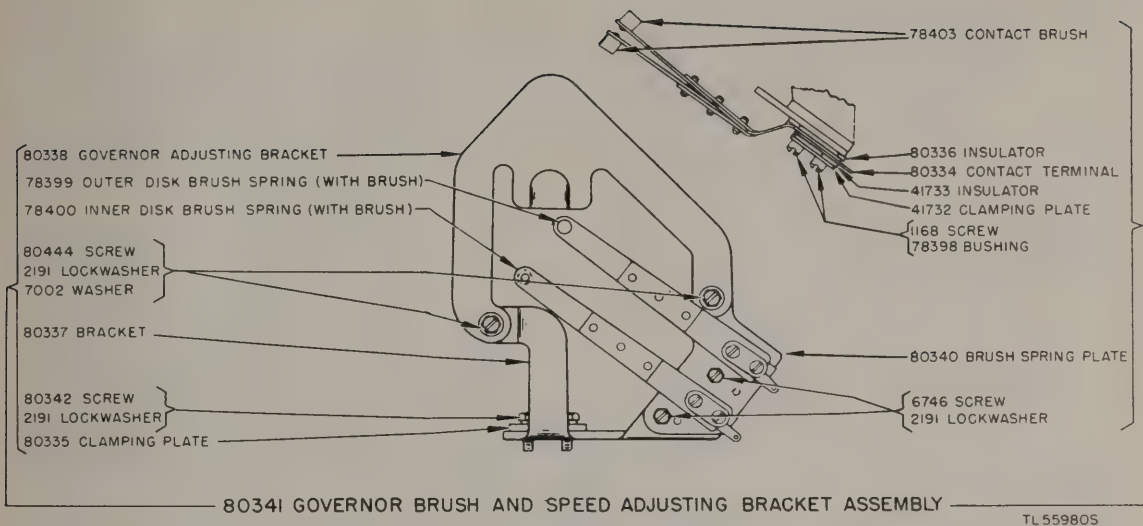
Governor brush and speed adjusting bracket assembly, location of parts.
